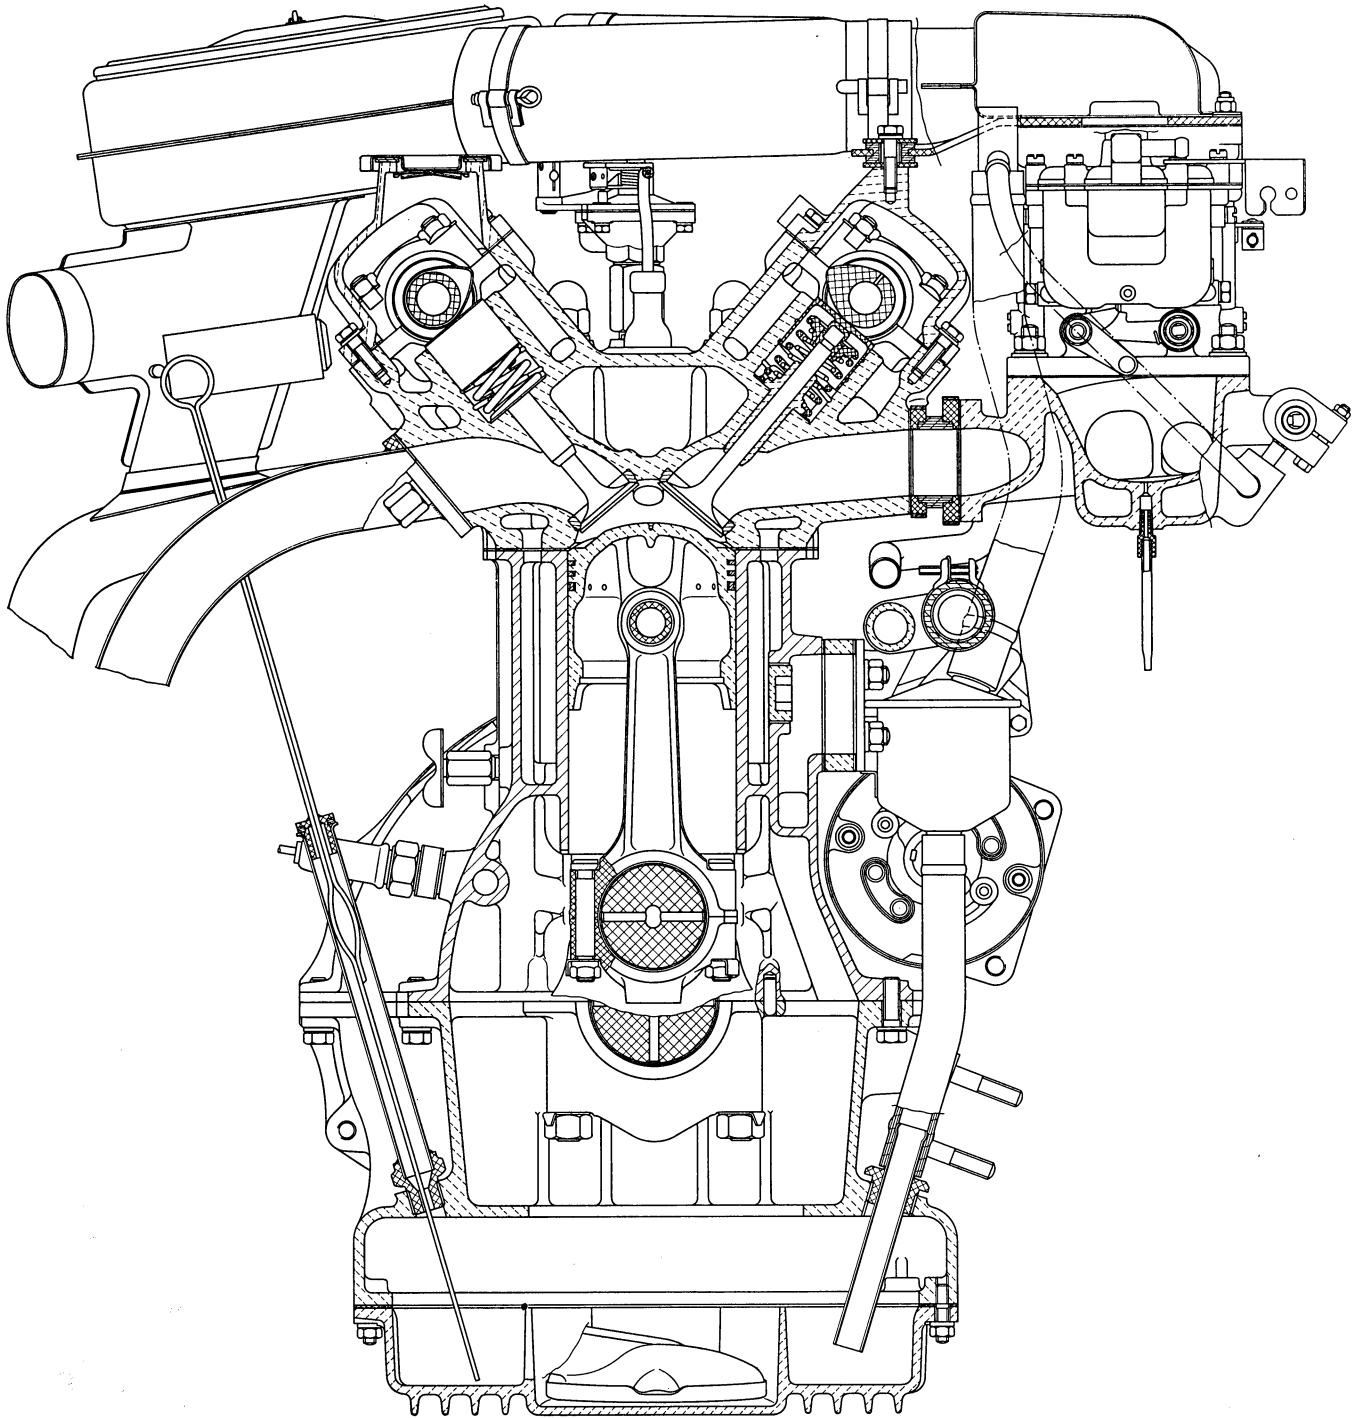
End sectional view of engine 118 B.000 across connecting rod, piston and valves.
